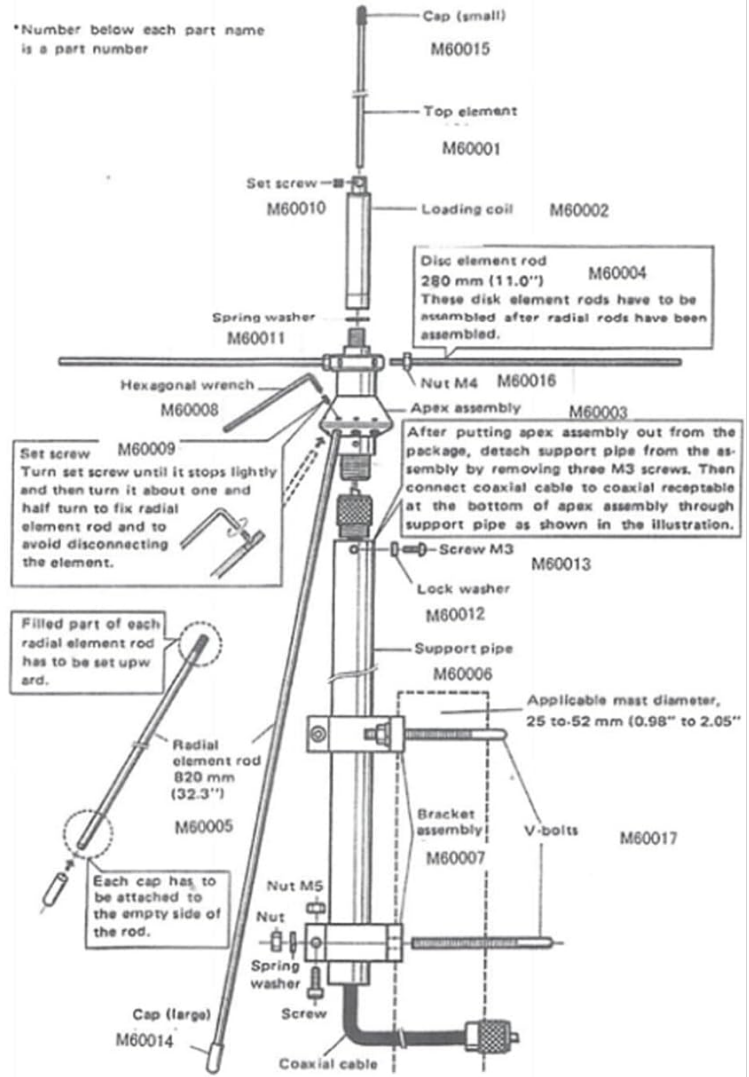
Detailed assembly diagram showing element placement and fastening points.
